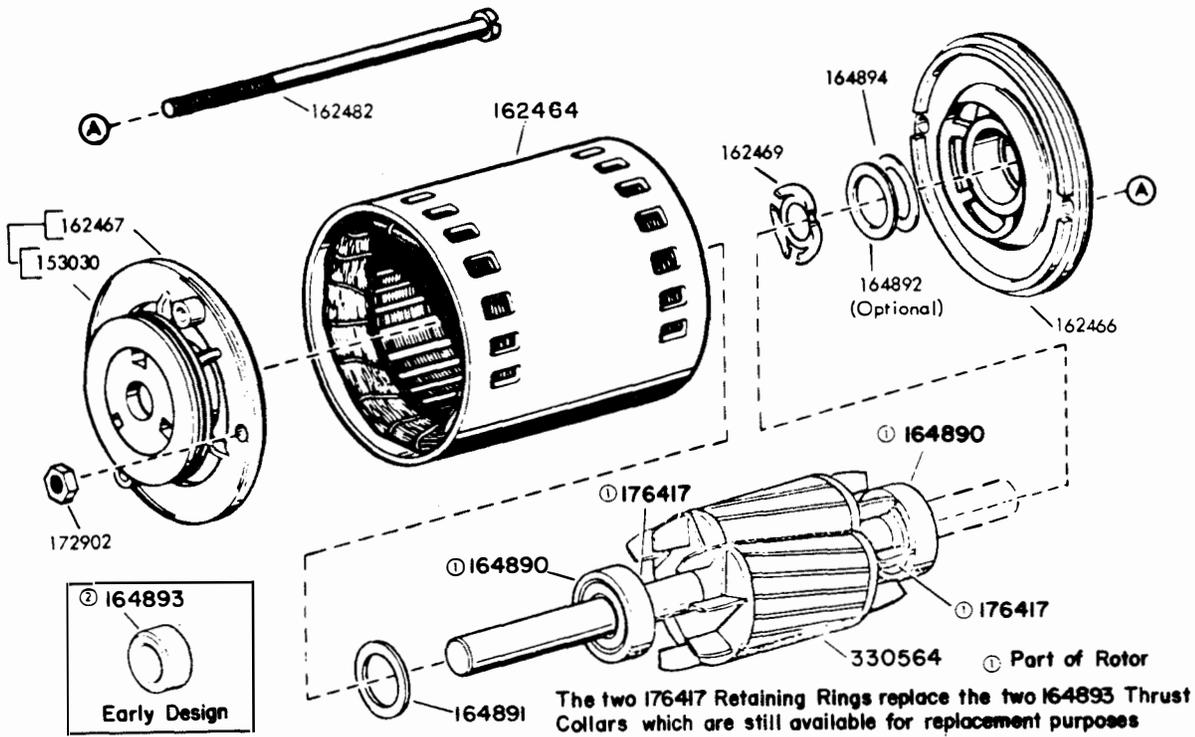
Synchronous Motor Assembly 151795 (Standard) - Used on LMU3 and LMU38
